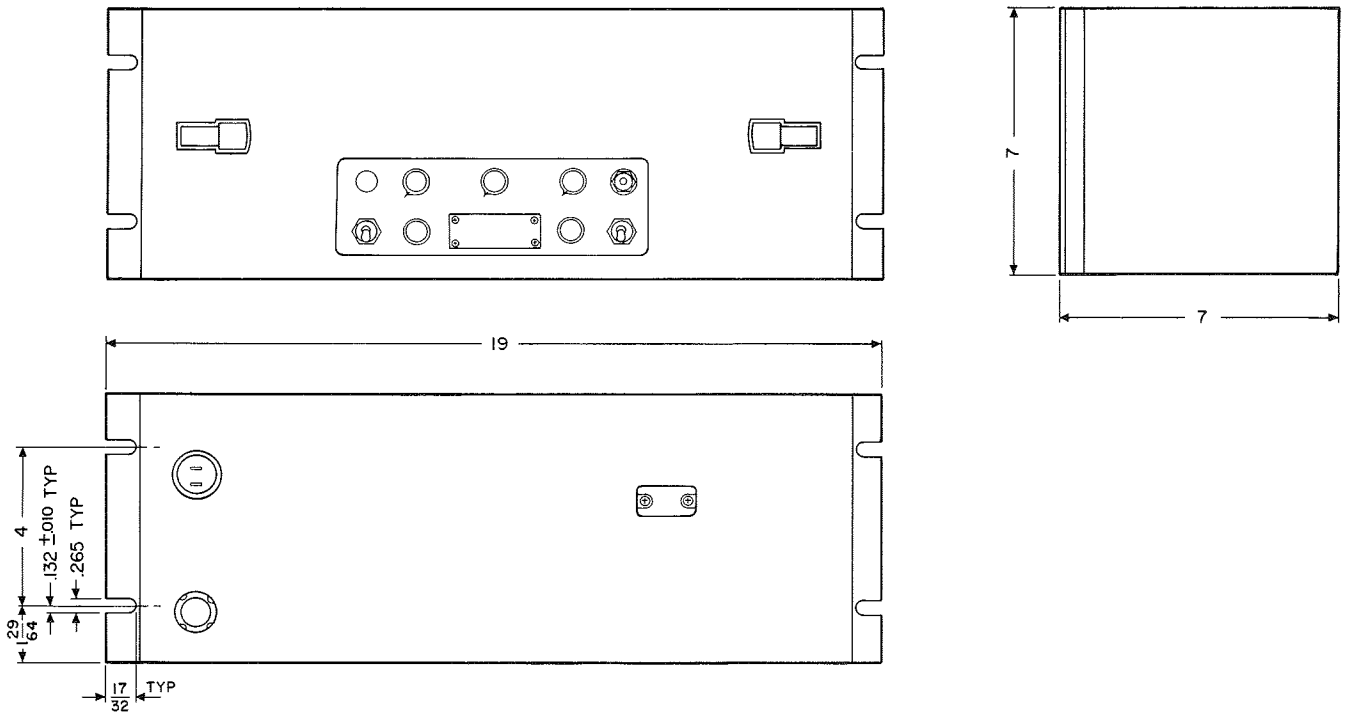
Outline and Mounting Dimensions, 51N-7F, Front Panel Flush Mounting
